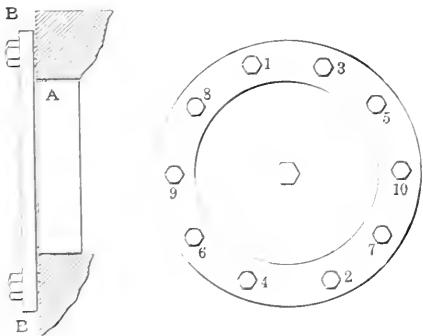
TIGHTENING UP A CYLINDER HEAD
